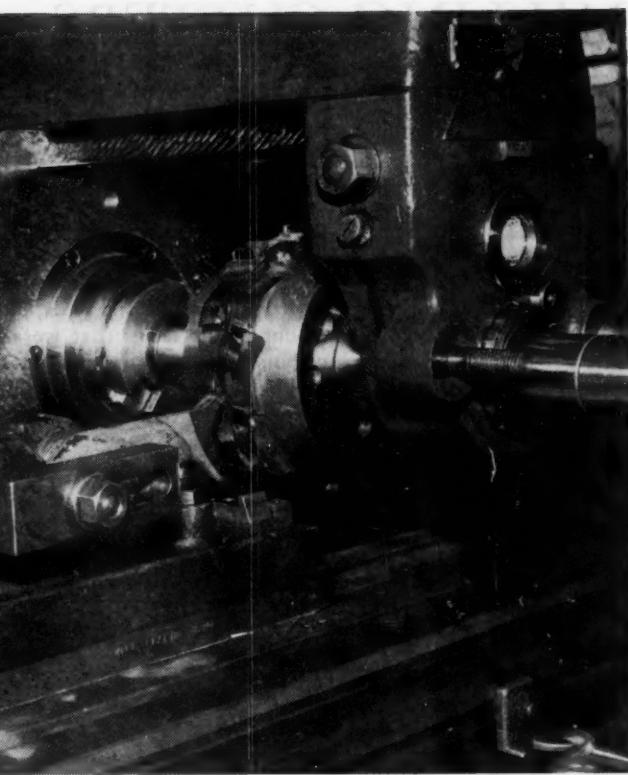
STRADDLE-MILLING OPERATION ON GEAR-SHIFTER FORK
